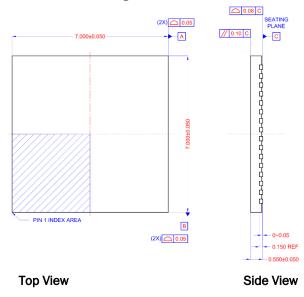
Olympus QFN64 Top & Side View Mechanical Drawings
